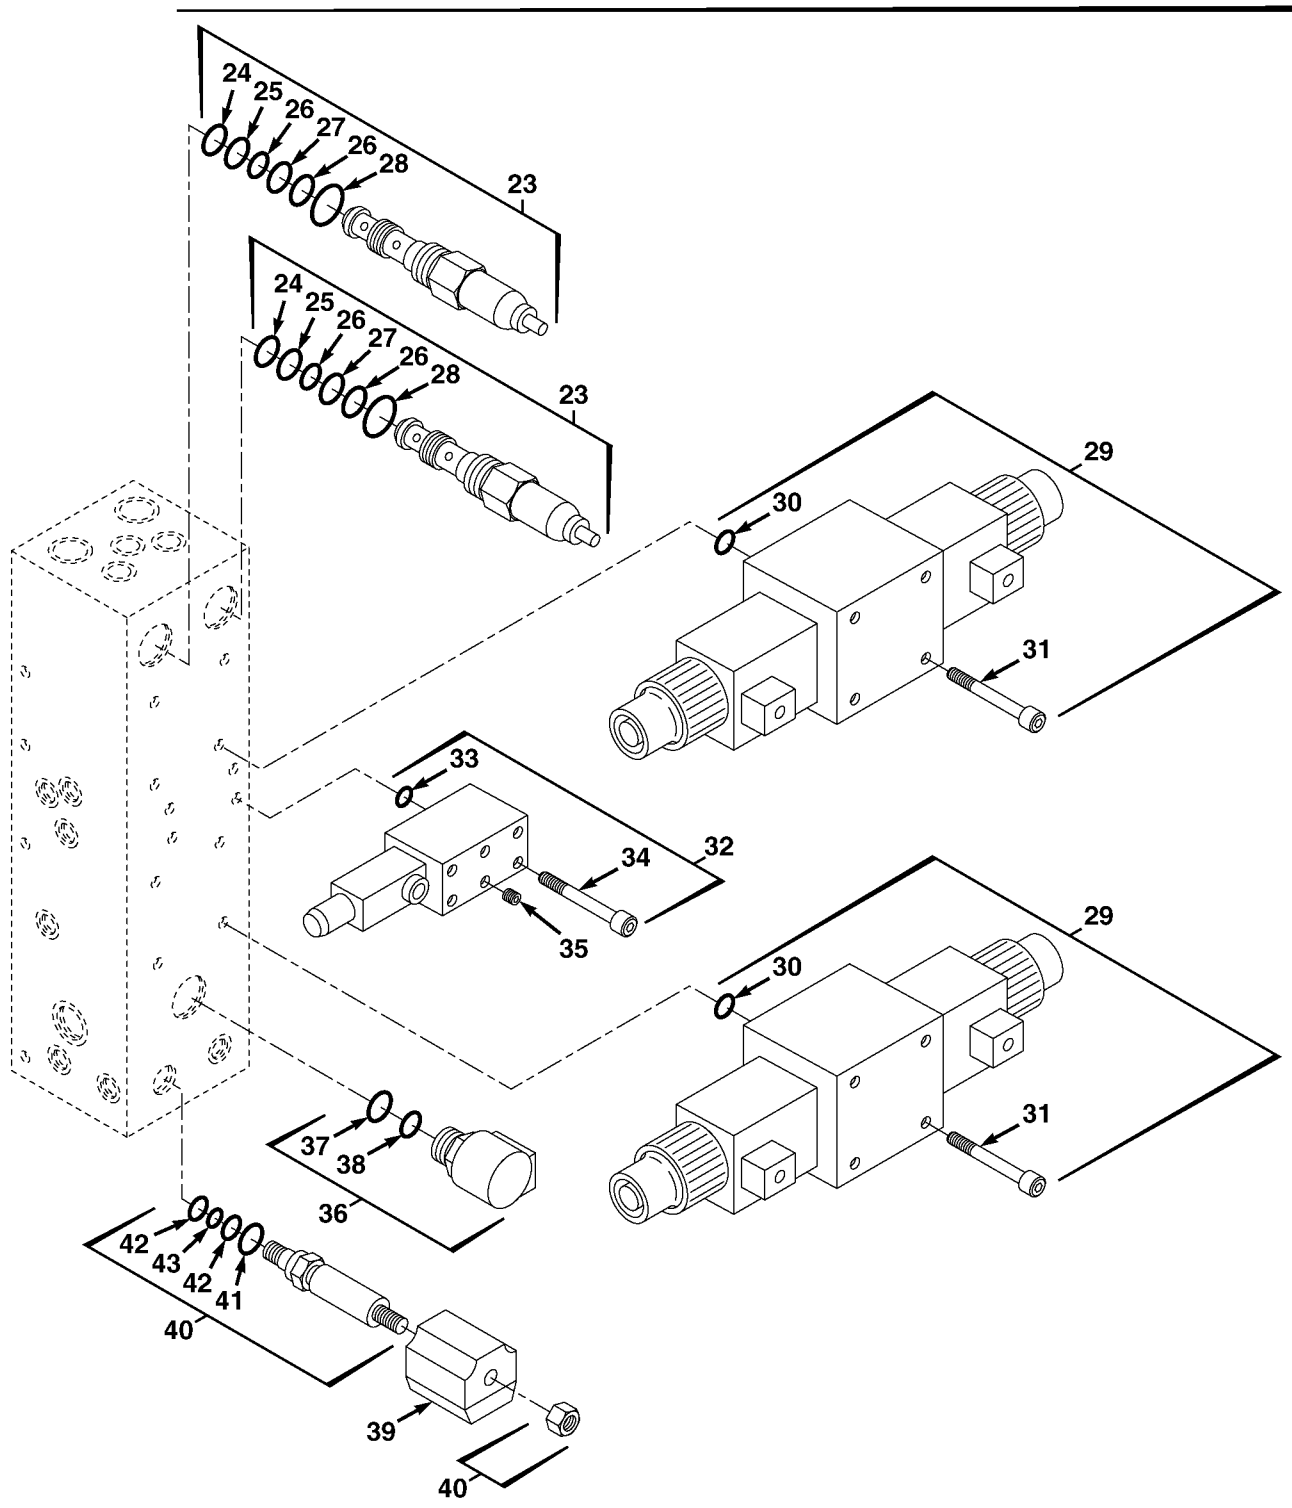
LHS MAIN MANIFOLD, RELIEF VALVES, AND LOAD CONTROL VALVES
